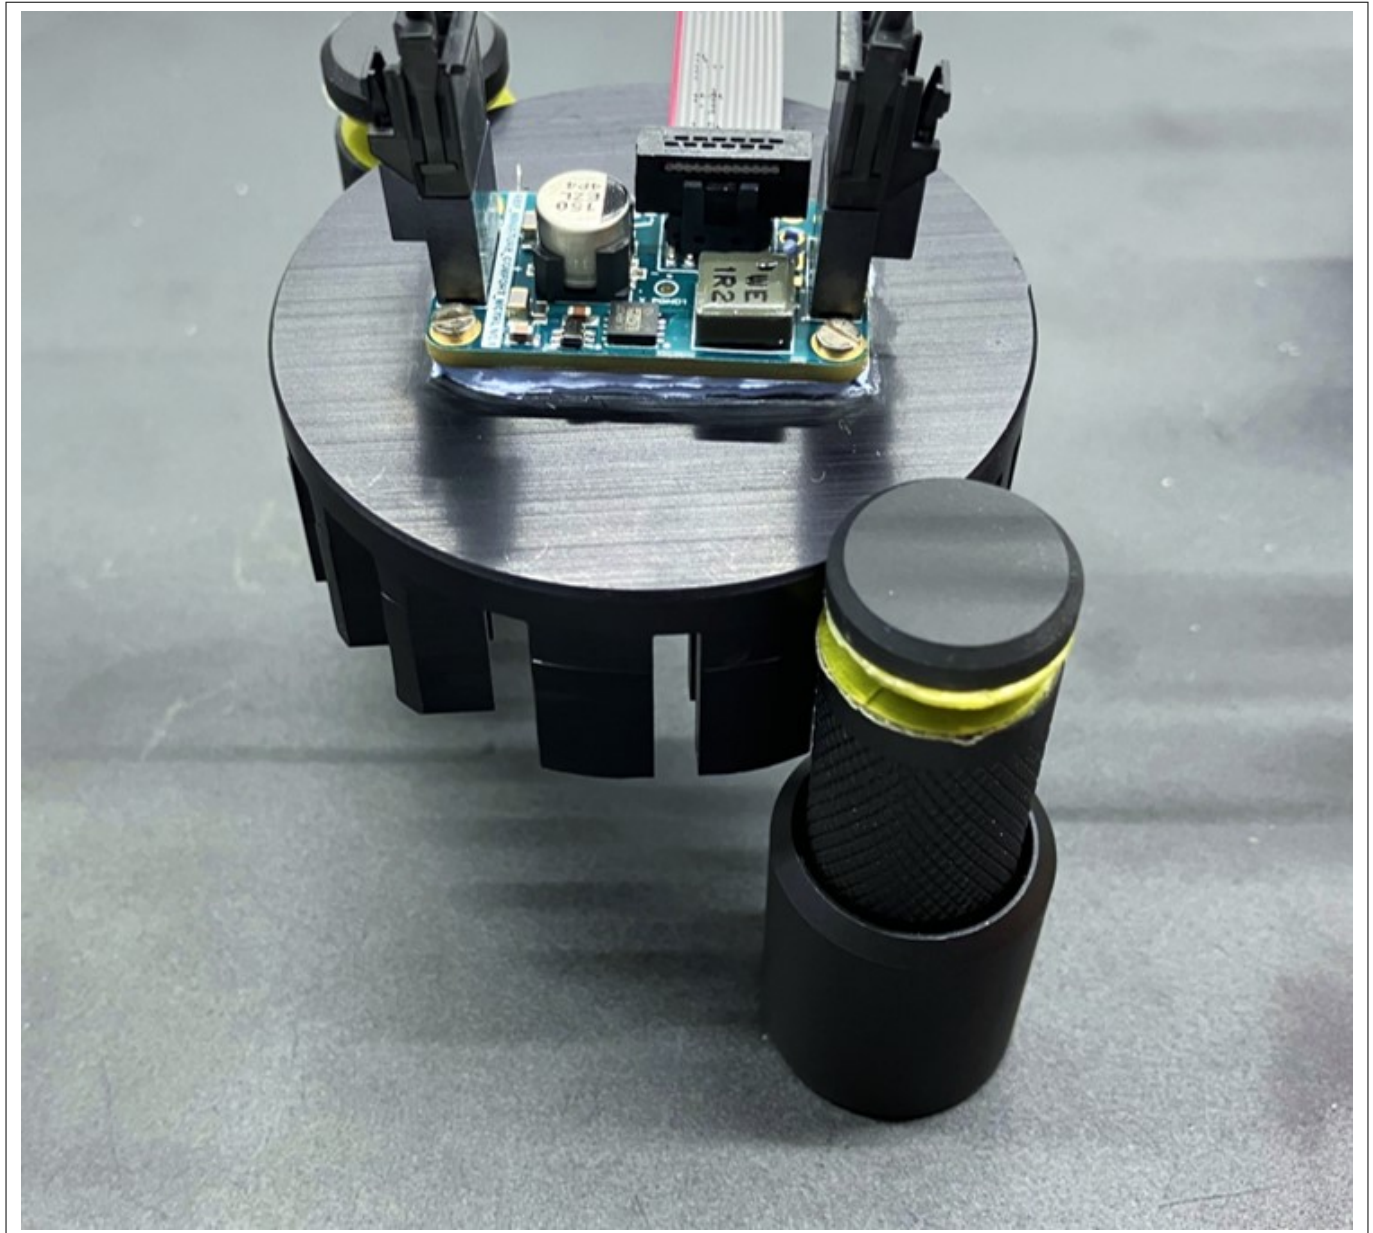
Picture of assembly on heat sink using thermal interface gap filler
